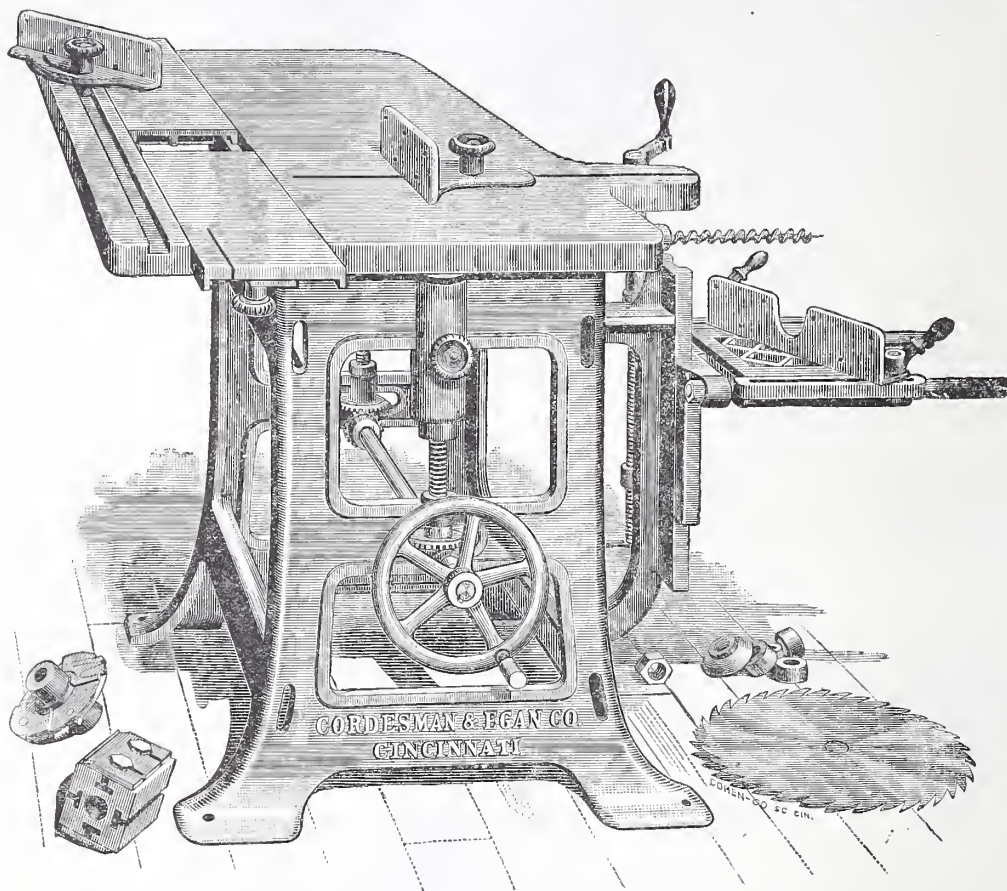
New Crosscut Saw and Boring Machine, Built by Cordesman & Egan Co., Cincinnati.
